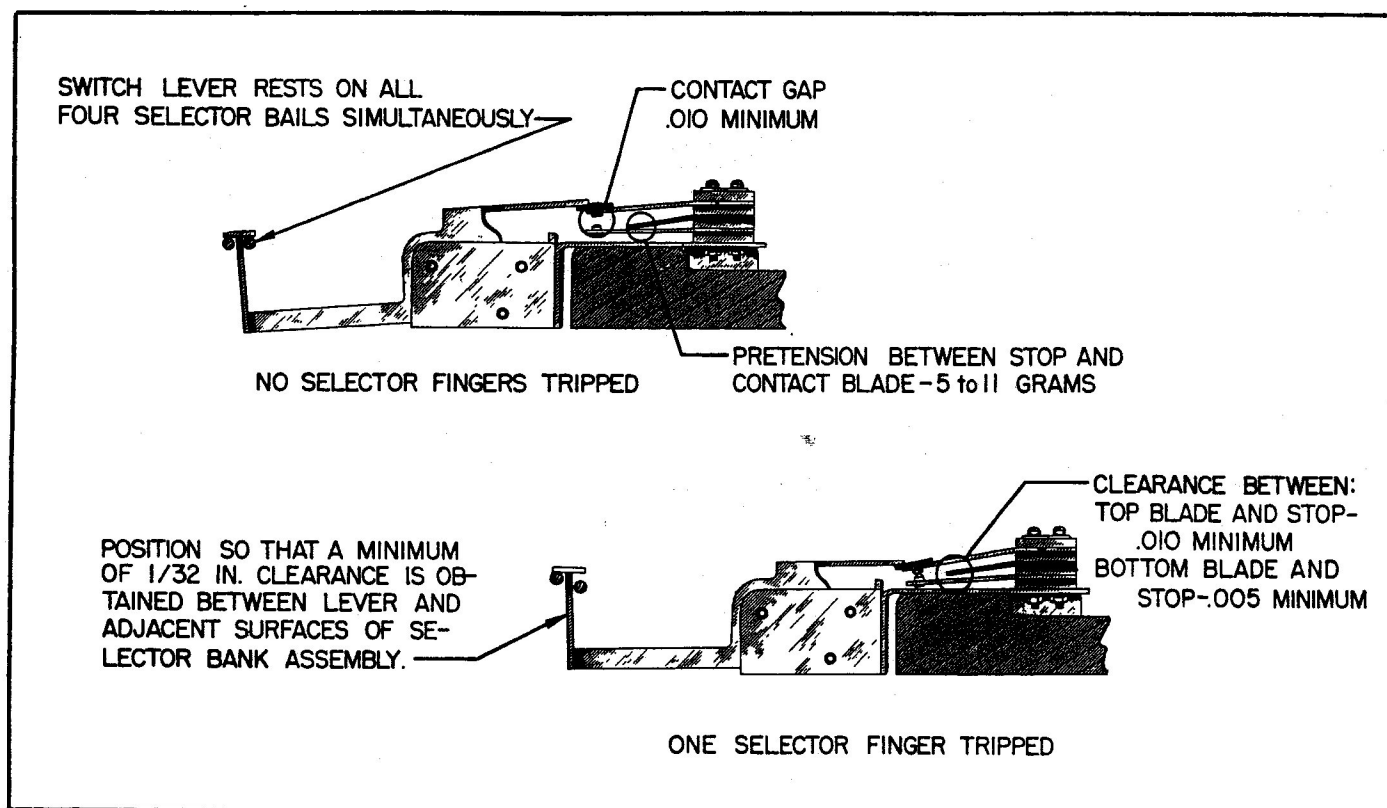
SELECTOR ASSEMBLY, ADJUSTMENT AND OPERATION
